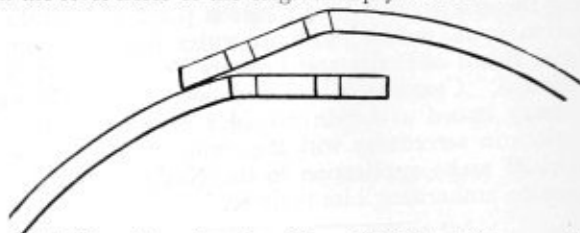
If Bent After Punching, Plates Will Bend Along a Line of Rivet Holes
